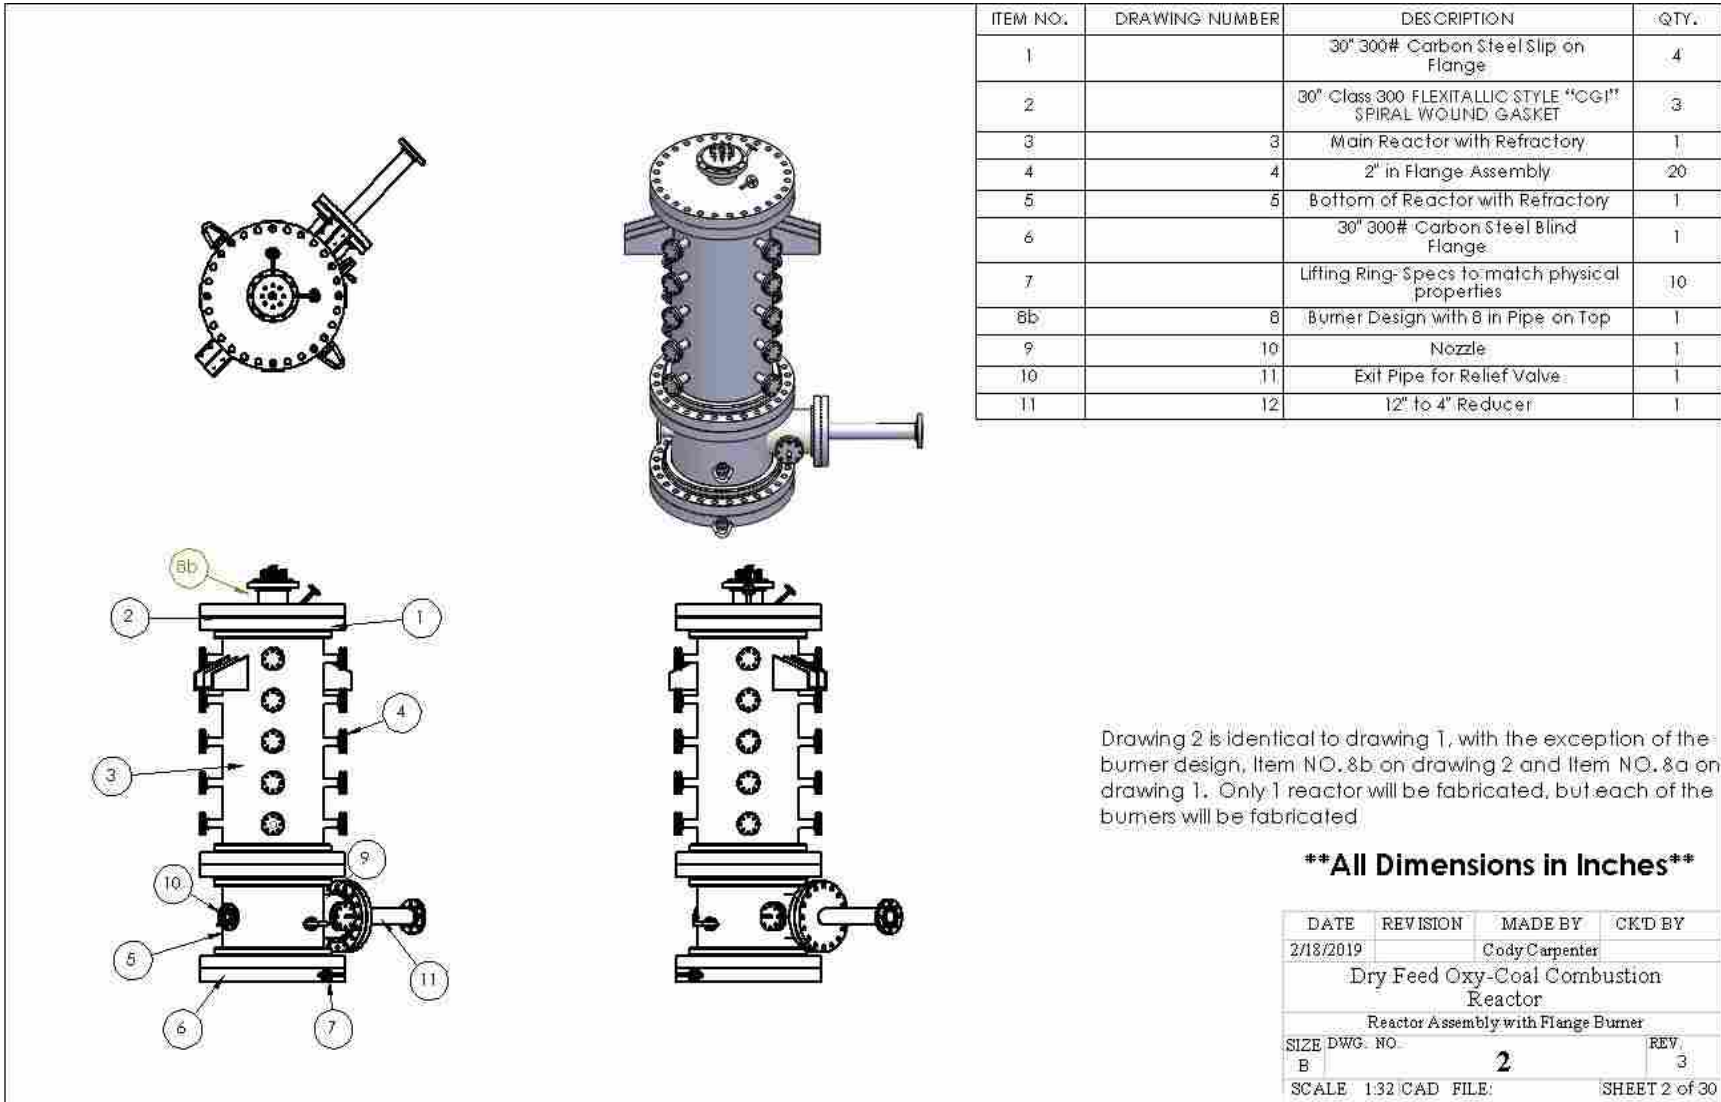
Drawing of POC Reactor Assembly with Flange Burner
